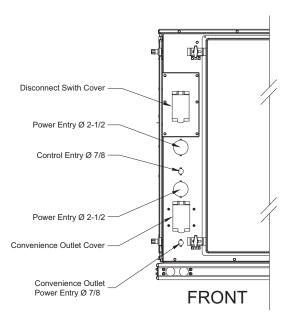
ZS-06 thru -12 Unit Electrical Entry
